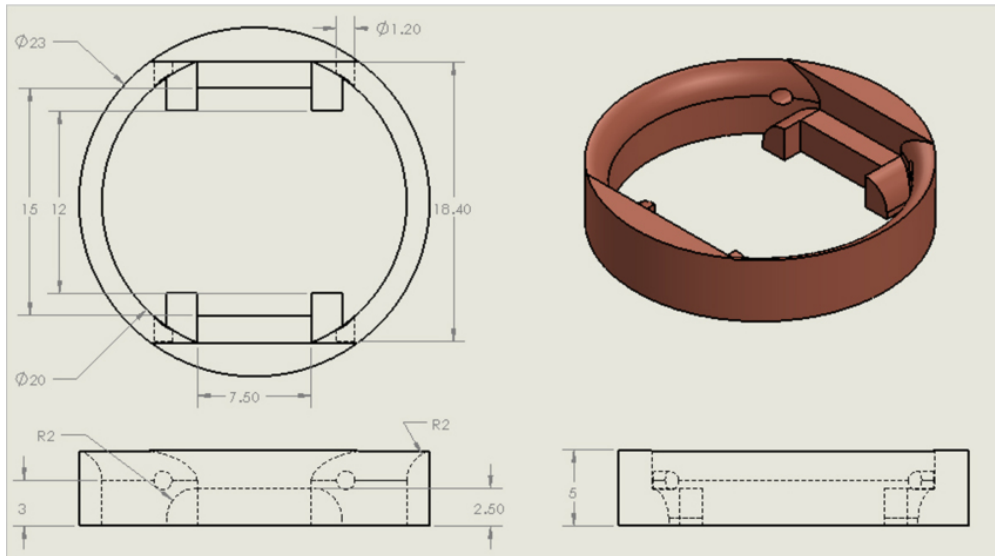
The CAD dimensional drawing of the prosthetic aortic valve holding ring
